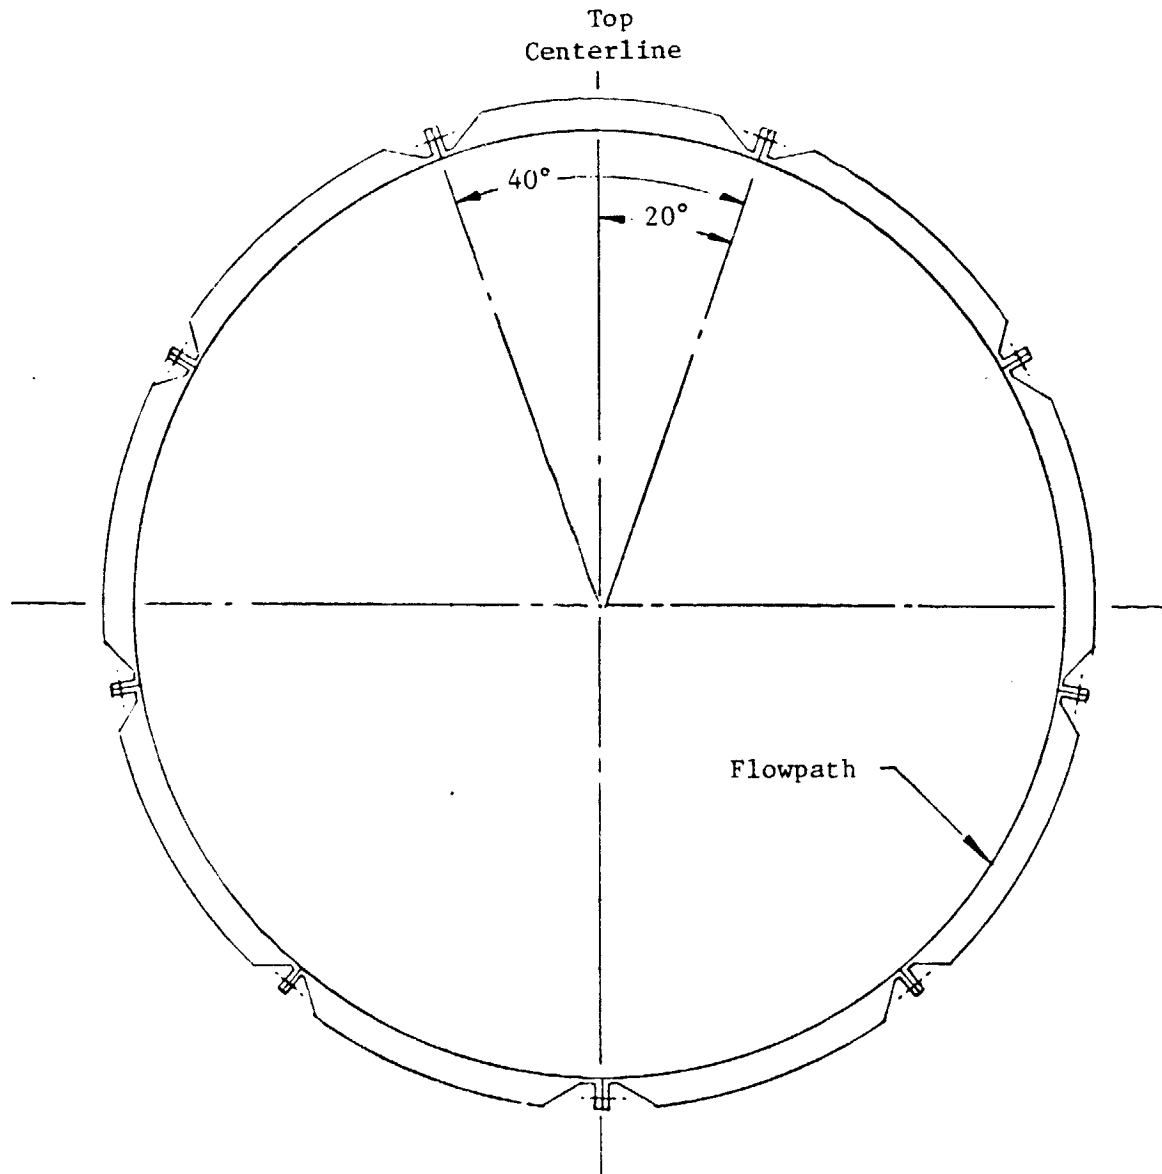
Inlet Diffuser Assembly (9 Panels Total).
